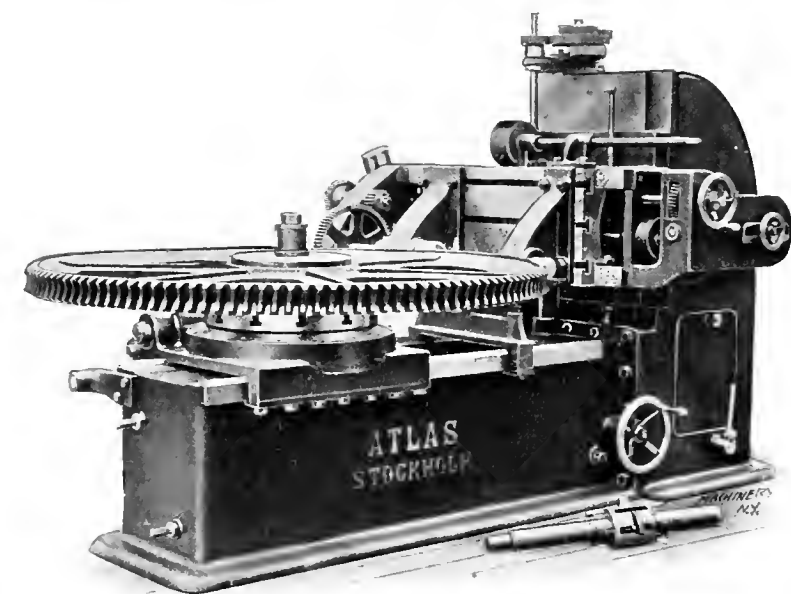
The Atlas Gear-cutting Machine, also shown in Fig. 34, arranged for Cutting the Teeth of Worm-wheels by the Fly-tool Process. Note Quadruple Fly-tool on the Floor opposite the Machine.
